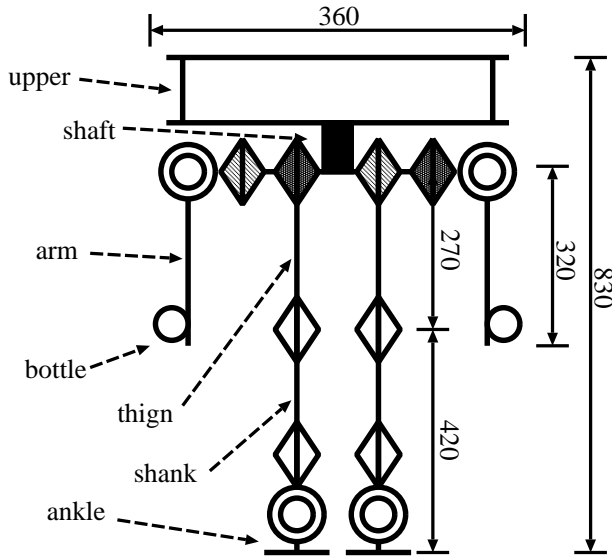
A sketch of joints of the 3D pneumatic driven walker
